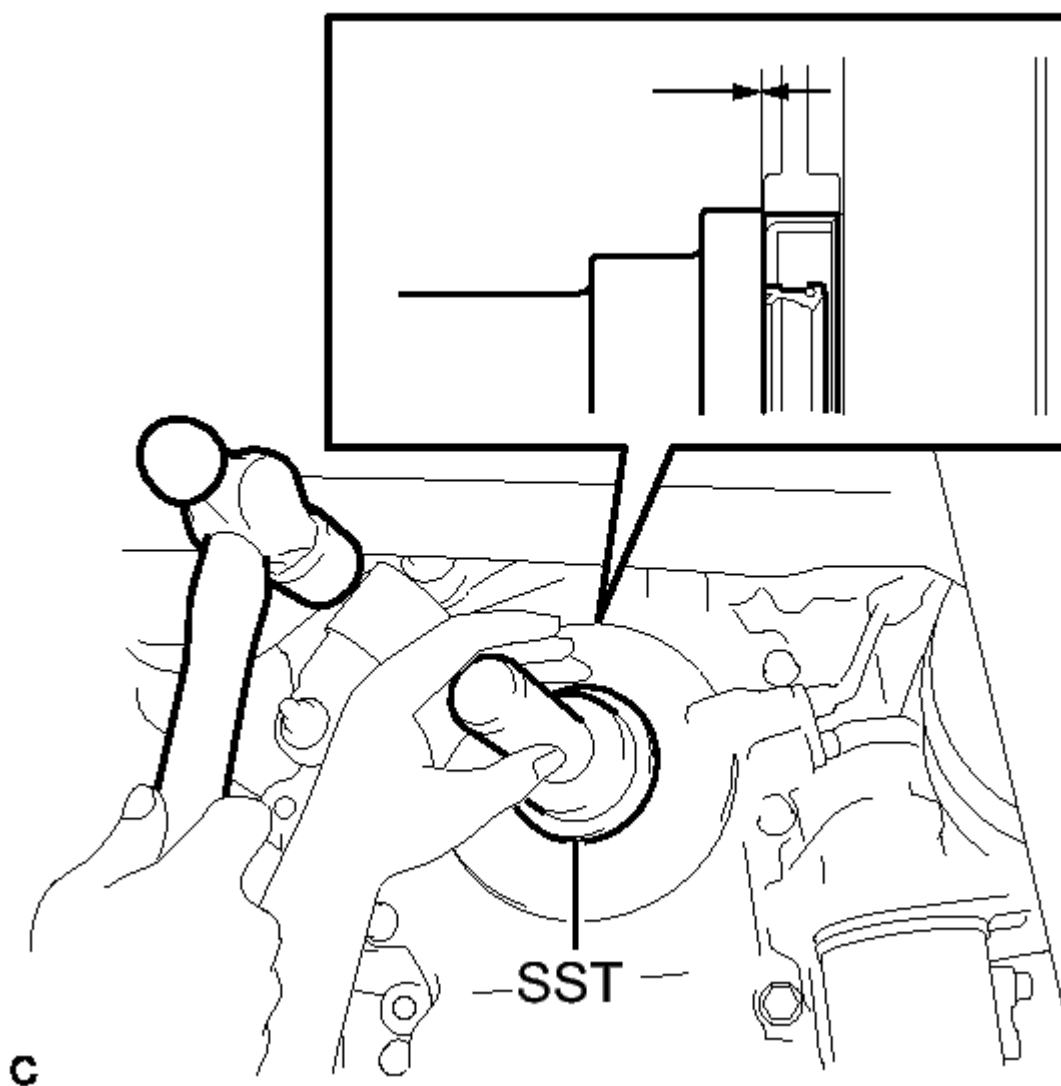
Tapping In Oil Seal Until Its Surface Is Flush With Rear Oil Seal Retainer Edge
